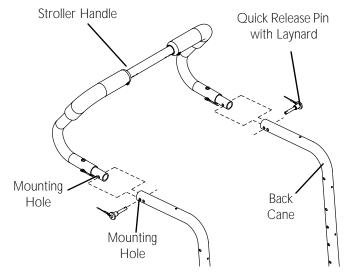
Installing/Removing Non-Adjustable Angle Stroller Handles
